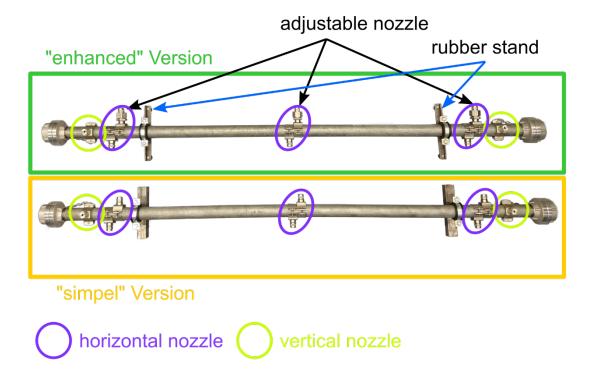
Manufactured Prototype of the Boundary Cooling Device
